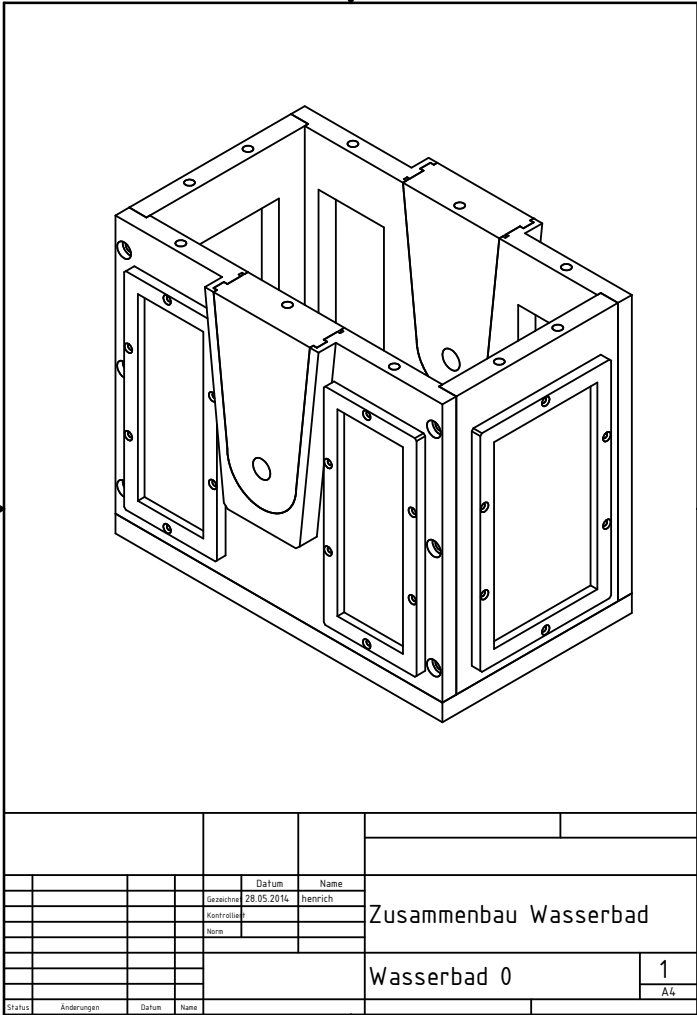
Technical drawing of the mounted rotating drum liquid container.
